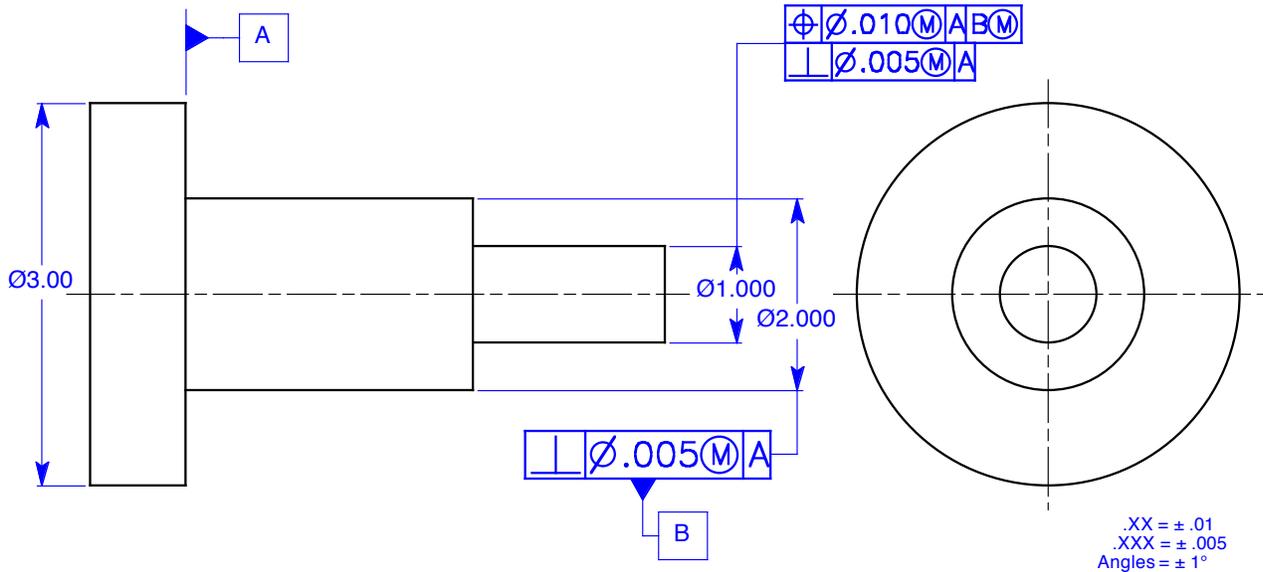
B The properly toleranced part shown in Fig. 6-4A
